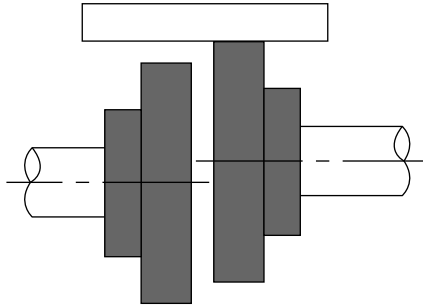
Straight-Edge Method of Checking Parallel Alignment
